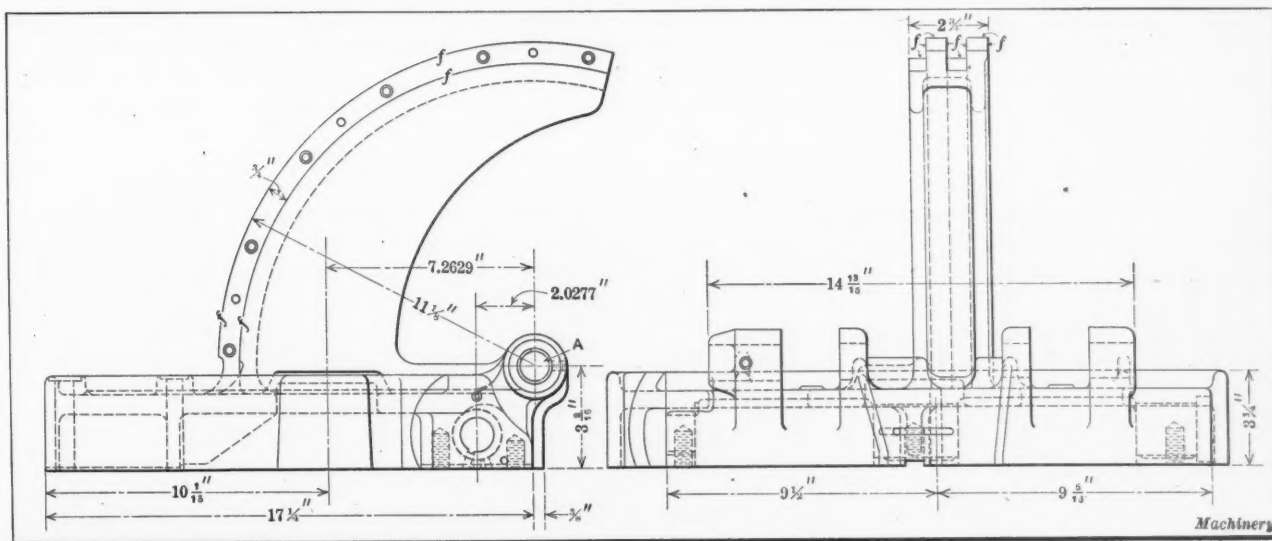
Horn Slide for Vertical Gear-cutting Machine, in which a Gang Milling Operation is performed as shown in Figs. 1 and 2
